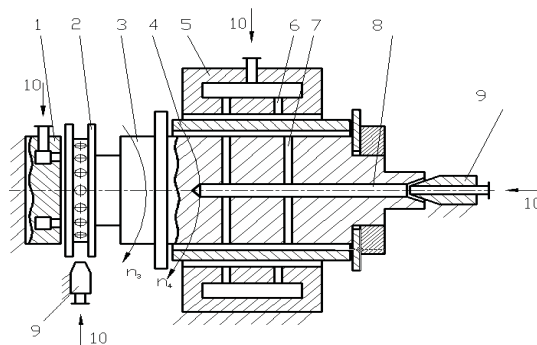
The rotor scheme of a gas lubricated bearing with a floating bush: 1 – thrust bearing (fixed); 2 – gas turbine; 3 – the rotor of which dynamics is investigated; 4 – floating bush; 6, 7 and 8 – gas feeding grooves; 9 – the nipple of air supply; 10 – gas feeding to the bearing
